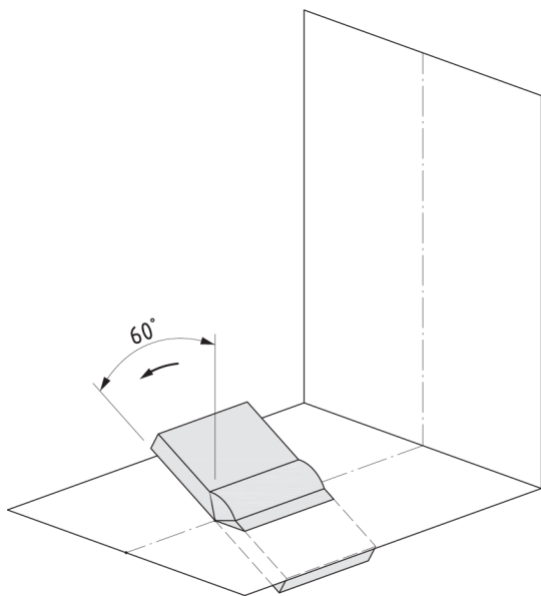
Welding position PA slope and rotation limits for butt welds
